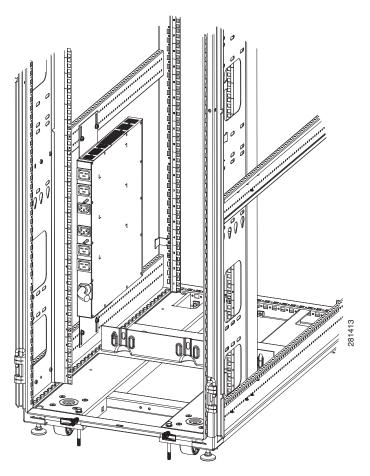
Attaching the Brackets to the Cisco PDU for a Tower Mount
